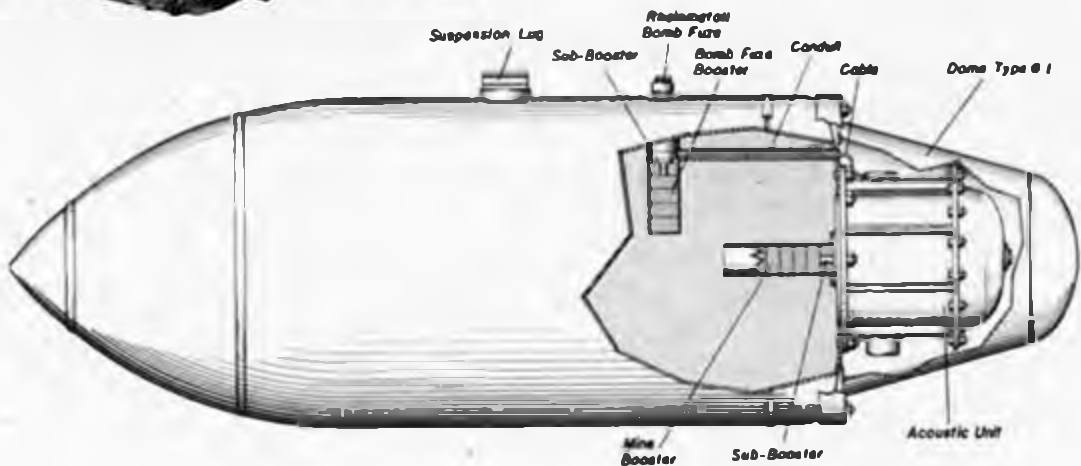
Mine Type GG Fitted With Acoustic Unit, Sectional View
